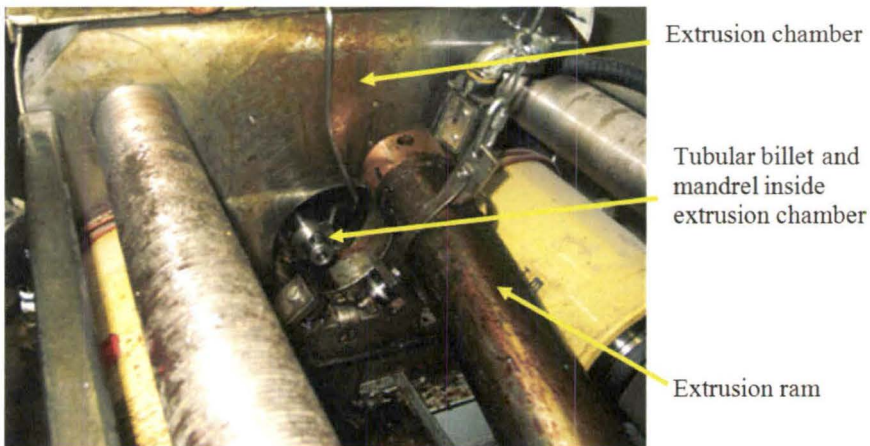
Insertion of tubular billet and mandrel into the chamber.
